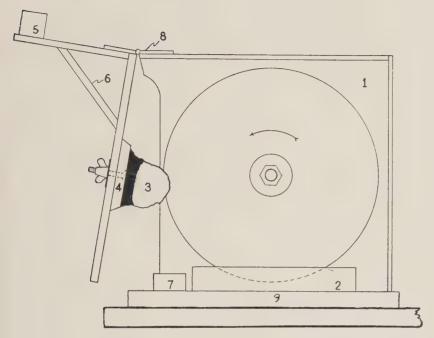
Side View of Diamond Saw, Splash Guard and Carriage Assembly. 1, splash guard; 2, lubricating well; 3, stone being sawed; 4, stone holder; 5, weight; 6, bracket; 7, carriage stop; 8, hinge; 9, splash pan. In this view the near side of the splash guard is not shown, so as to give a better view of the interior.
